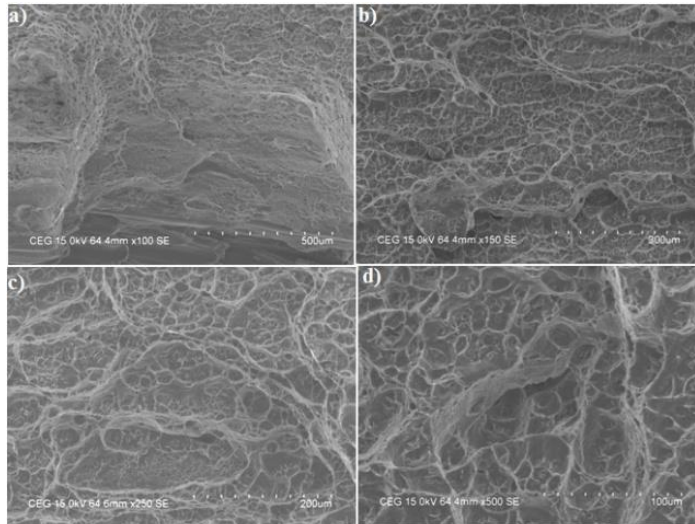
Fractographs with different scale of FSW tensile test specimen produced at welding speed of 150 mm/min and the rotational speed of 1000 rev/min.
